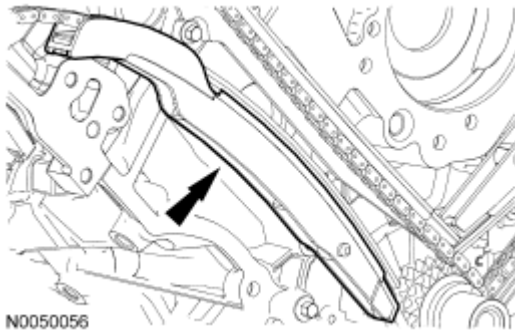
Locating RH Primary Timing Chain Tensioner Arm
